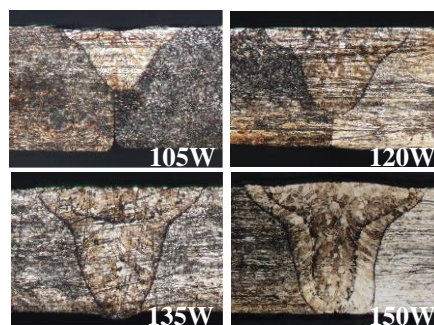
Micrograph of weld part in laser welding joint of SUS304 pipe
